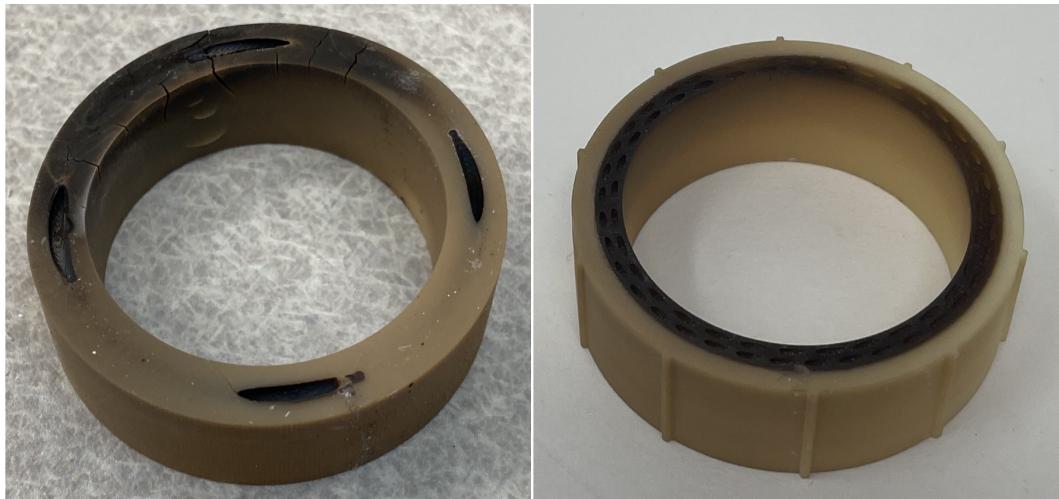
Side by side photographs of the initial (left) and revised (right) diffusers, post-testing.
